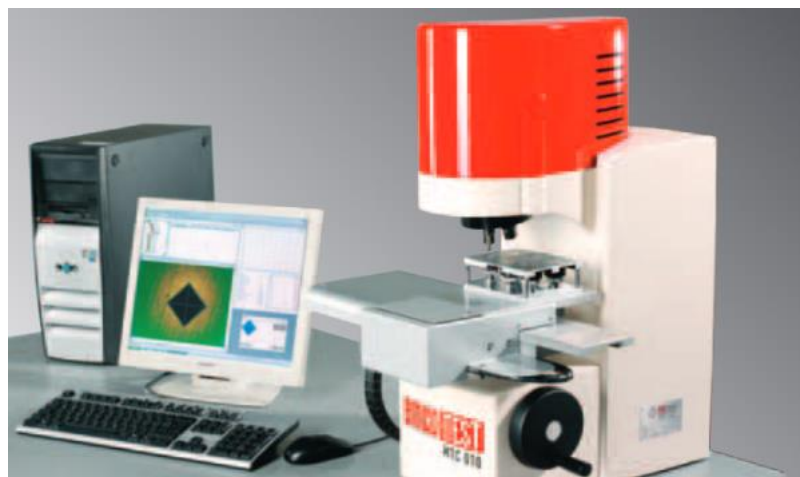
EMCO Test M1C010 hardness testing machine [85]
